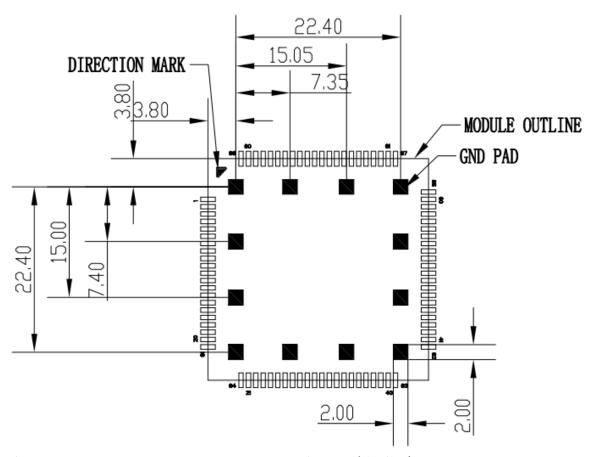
RECOMMENDED LAND PATTERN (Unit: mm) (detail B)
